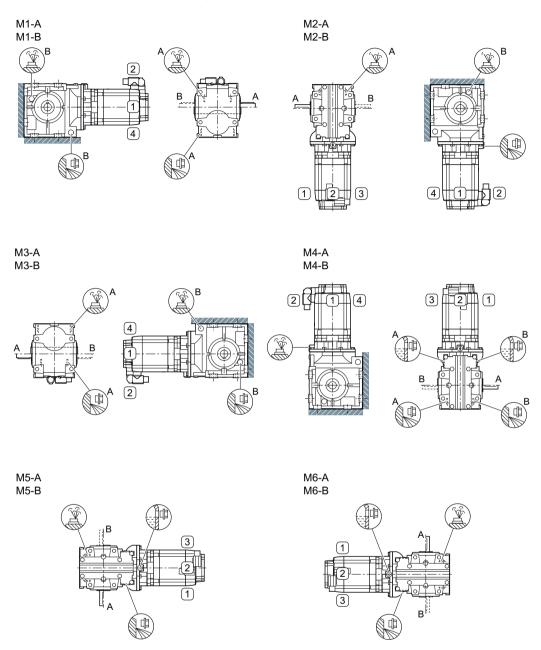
Mounting positions for servo helical worm geared motor C, foot-mounted design, size 29, 2 stage
